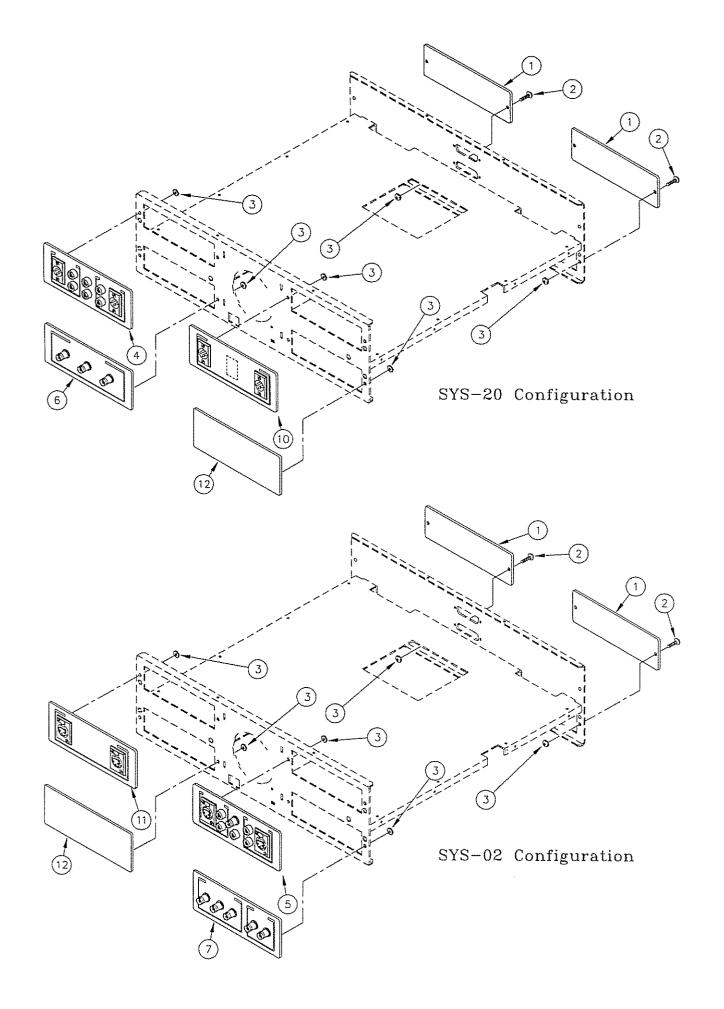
FRONT AND REAR PANEL ASSEMBLY
